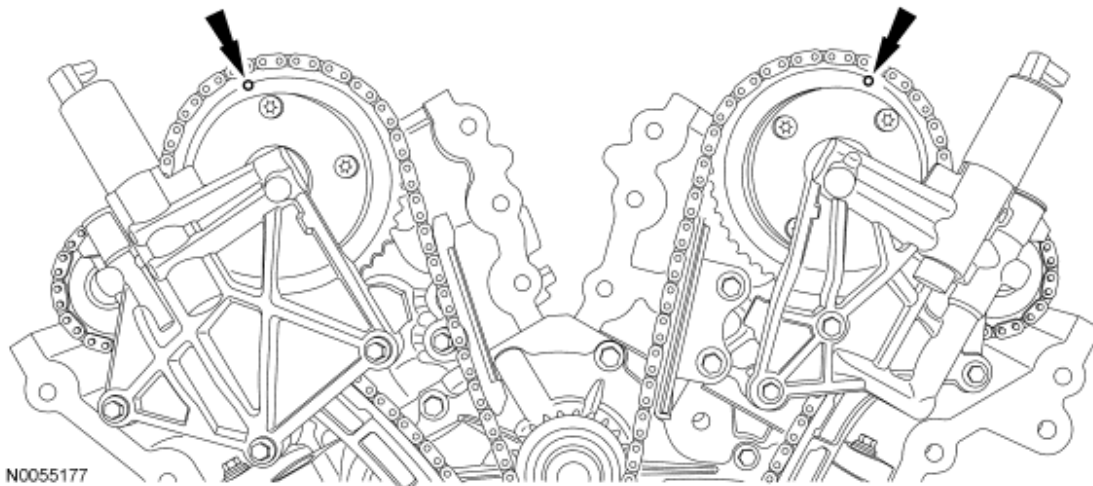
Aligning Timing Marks On Variable Camshaft Timing (VCT) Assemblies
